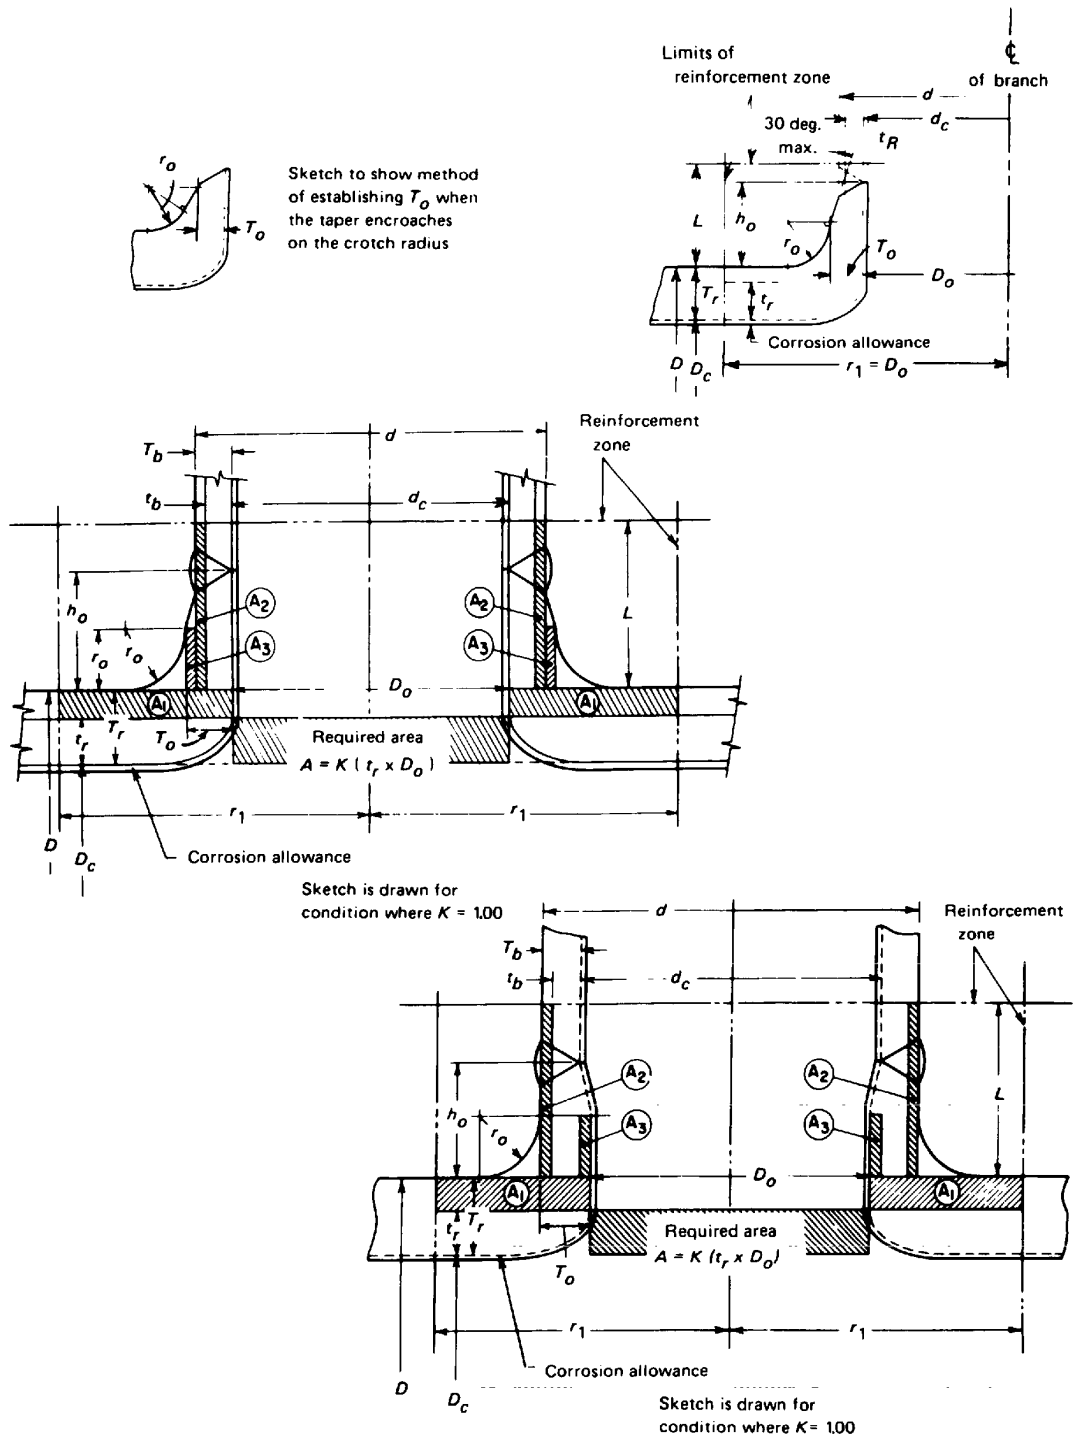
(a)-1 REINFORCED EXTRUDED OUTLETS
